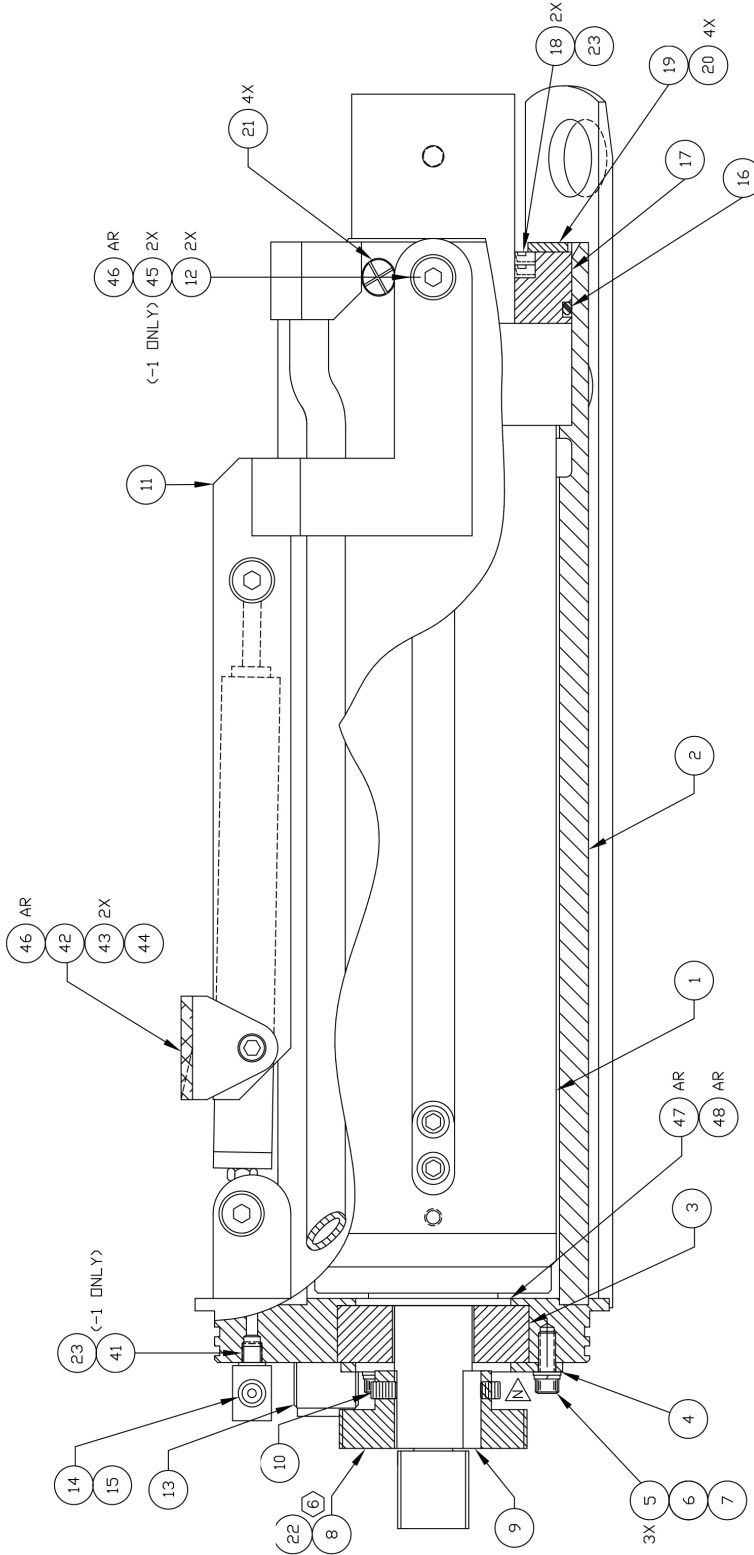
MOTOR ASSY,IN/OUT,66:1 MAXON, KC324
